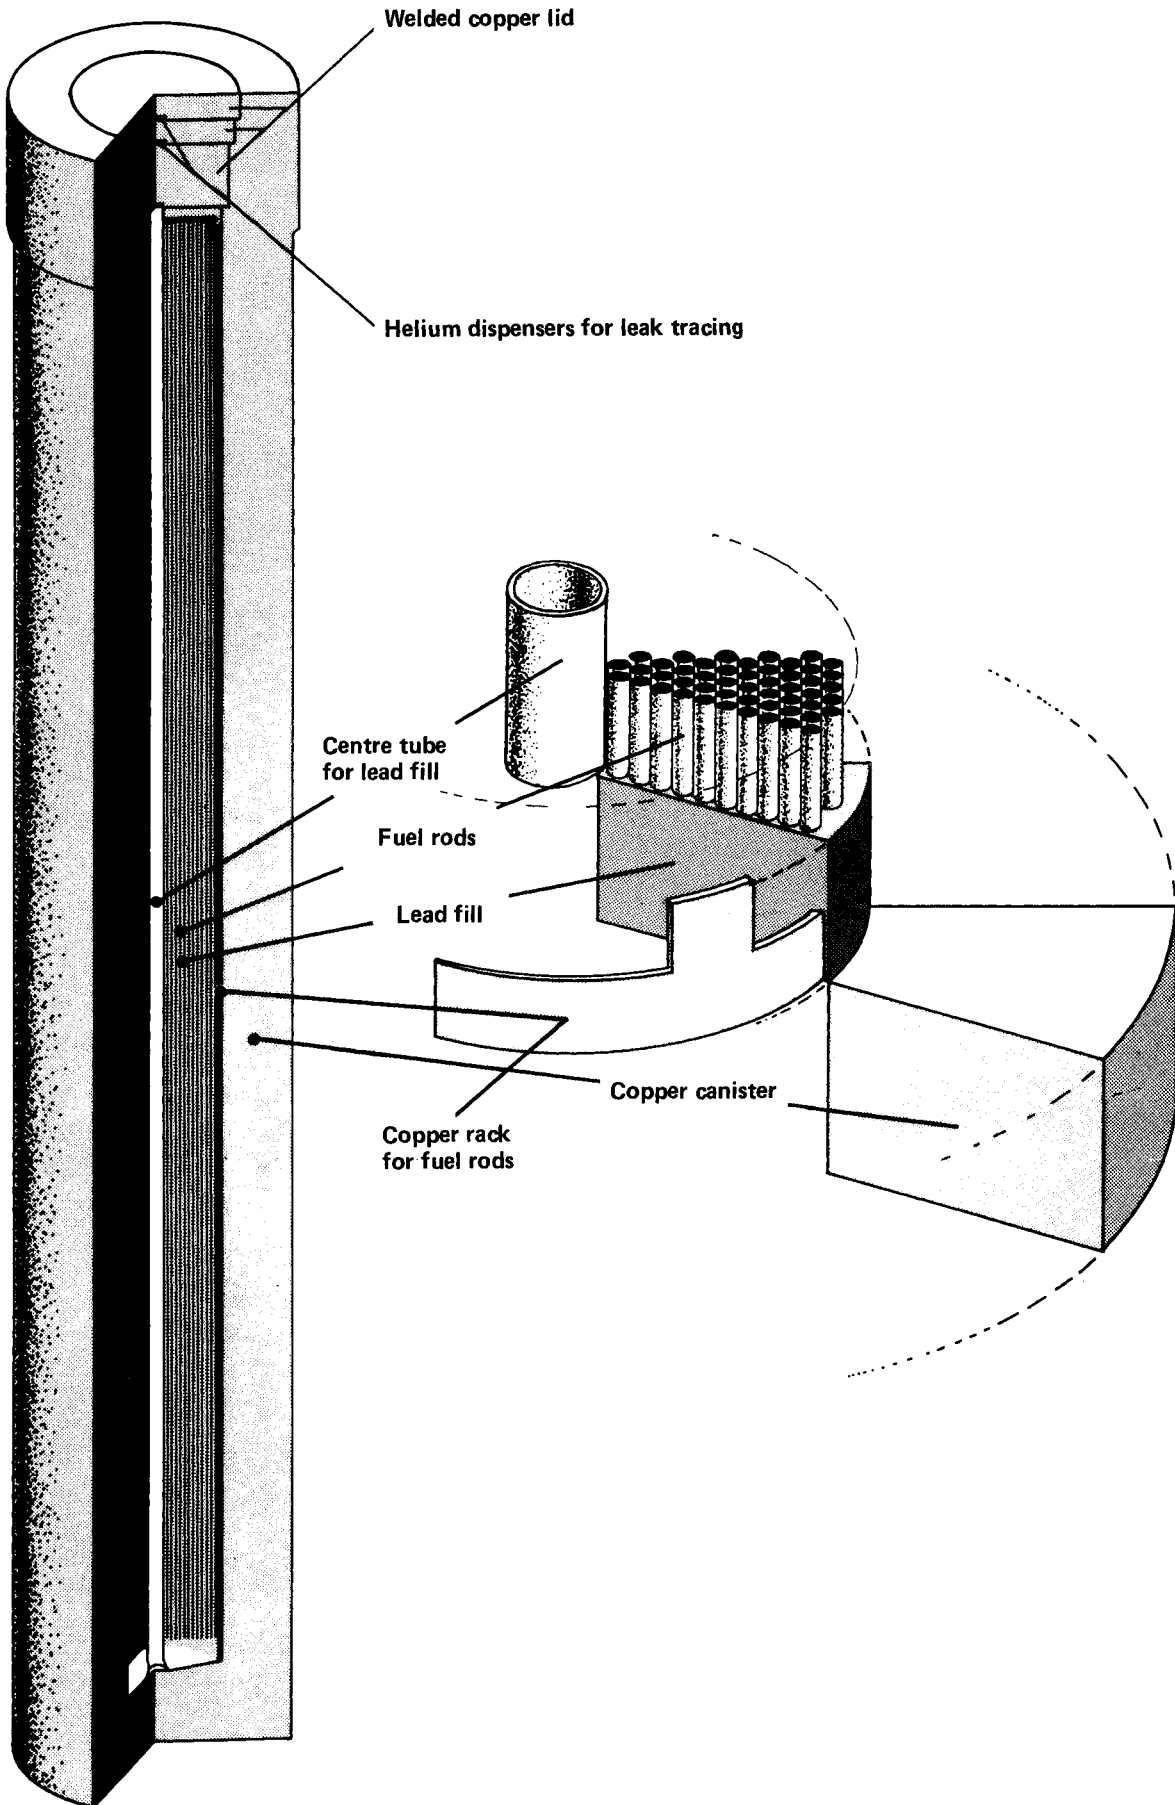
Cutaway drawing of copper canister filled with fuel rods. After dismantling of the fuel assemblies, the fuel rods are placed in a cylindrical rack whose perforated copper shell encloses the fuel rods. The filled rack is covered with a perforated lid and lowered into the canister. The centre tube is used for lifting and lead casting.
